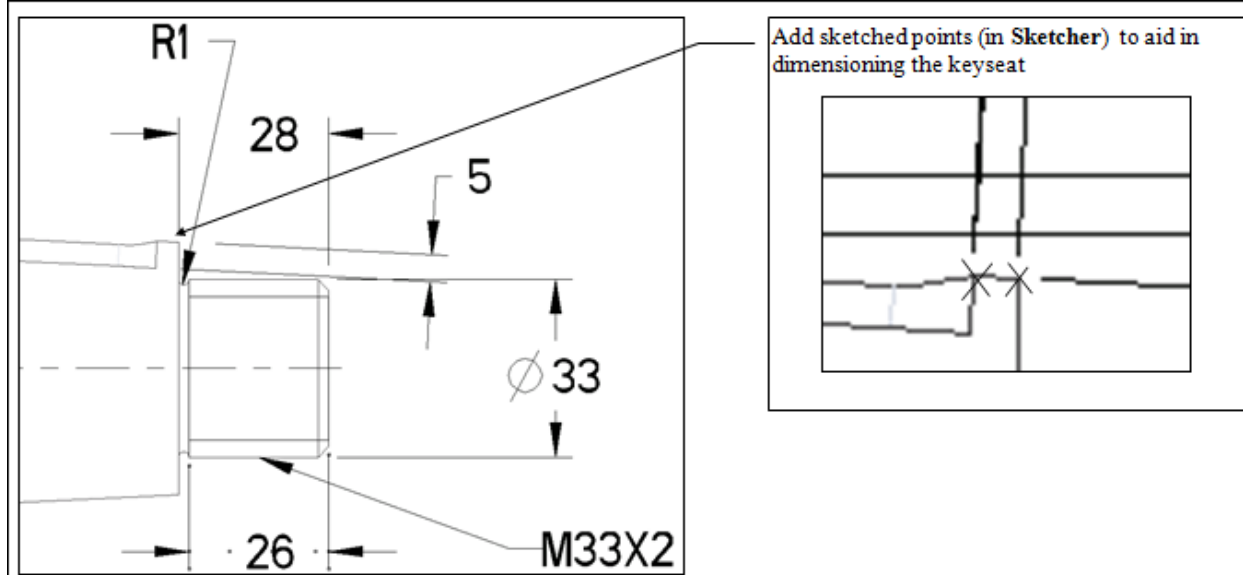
Coupling Shaft Drawing, Sheet One, M33 X 2 Threads
